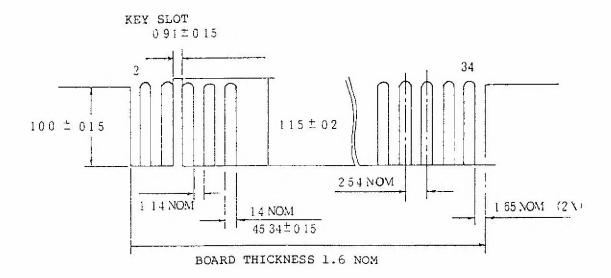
Connector Jl Dimensions (mm) and Pin Numbers
